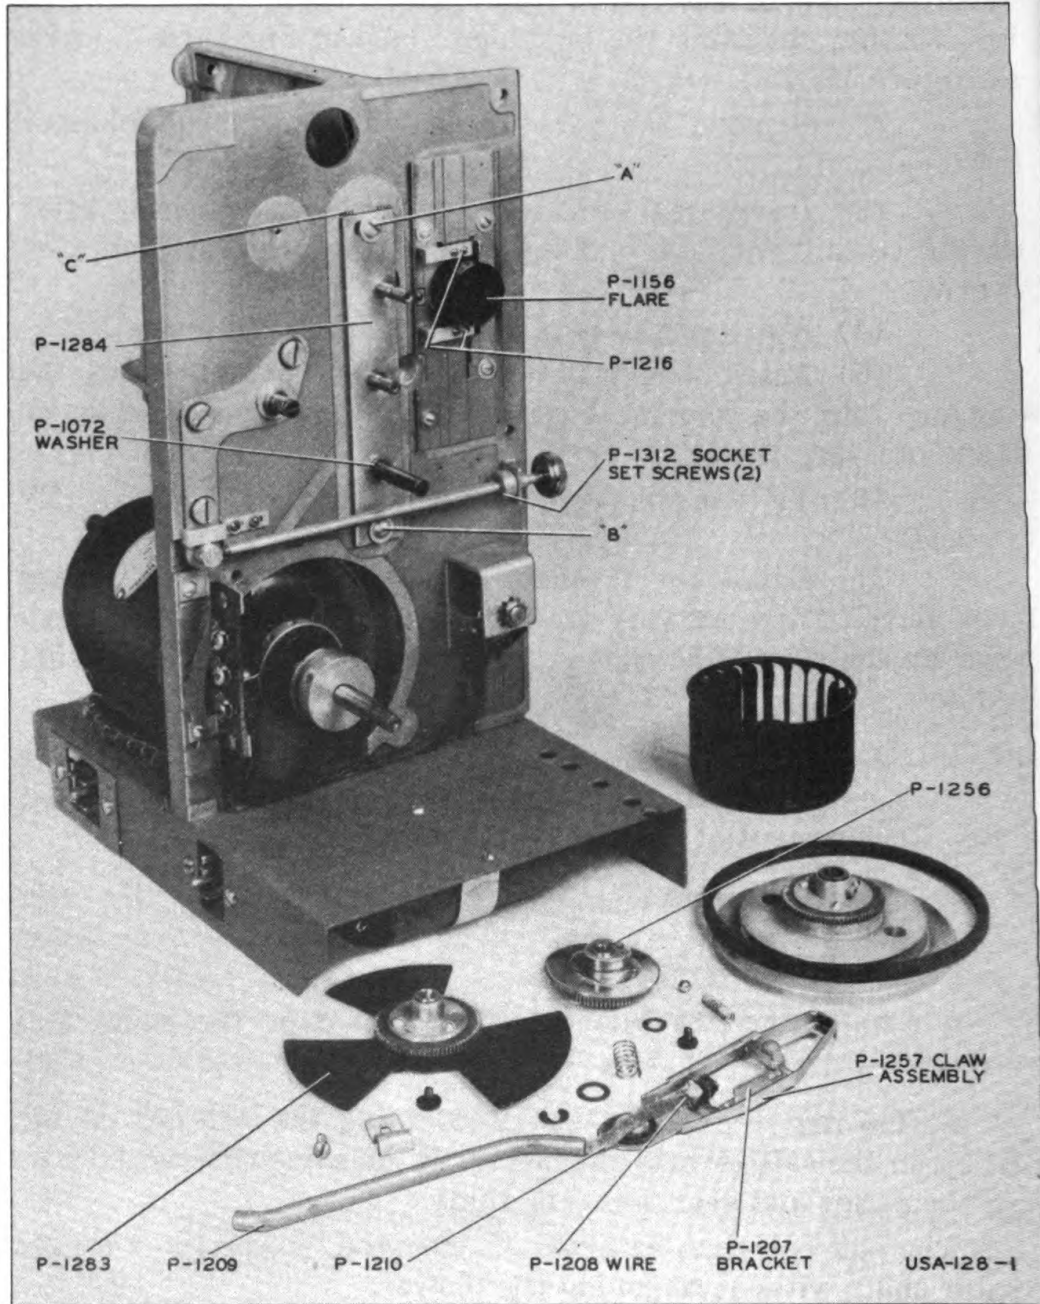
Projector—Rear View—Intermittent Mechanism Removed
